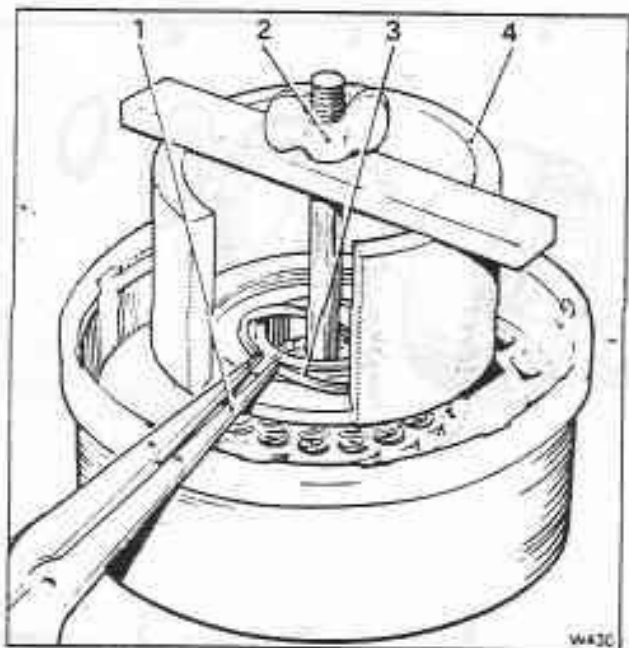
Removing and fitting the direct clutch housing snap ring
